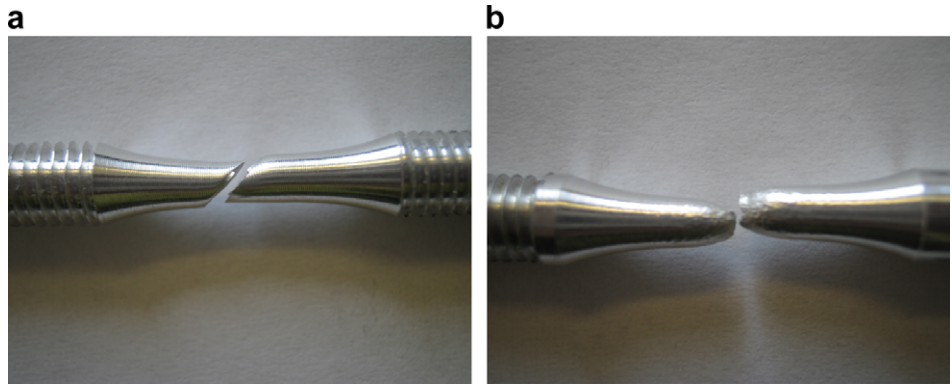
Fracture modes: (a) shear fracture and (b) cup-cone fracture.
